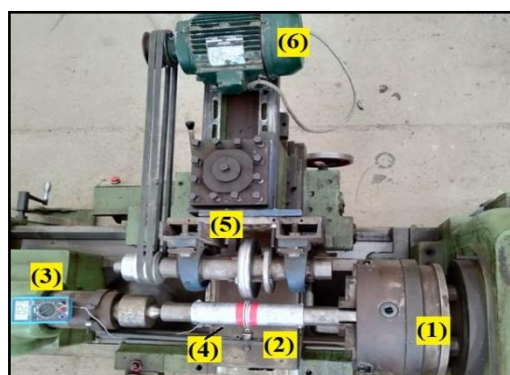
Top view for experimental setup of OFCW process (1) Lathe chuck (2) Workpiece (Al. Tubes) (3) Digital multimeter (4) Thermocouple (5) Welding tool (6) External motor
